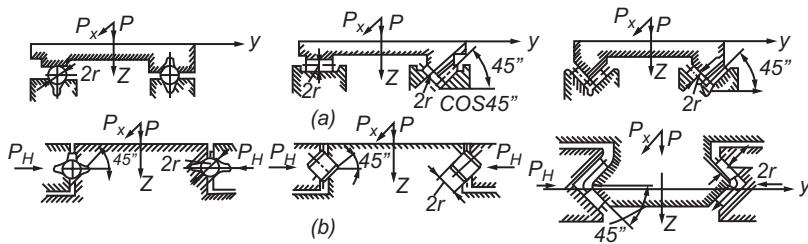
D Rolling guides, (a), open type; (b), closed type.
